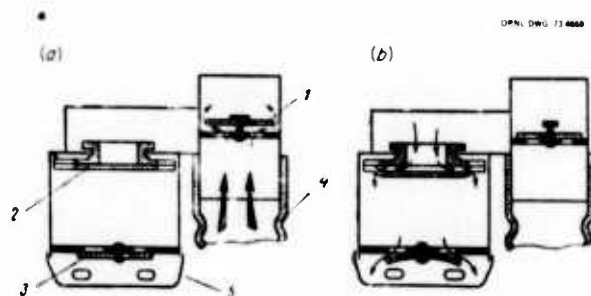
Valve box: (a) Inlet; (b) outlet.
